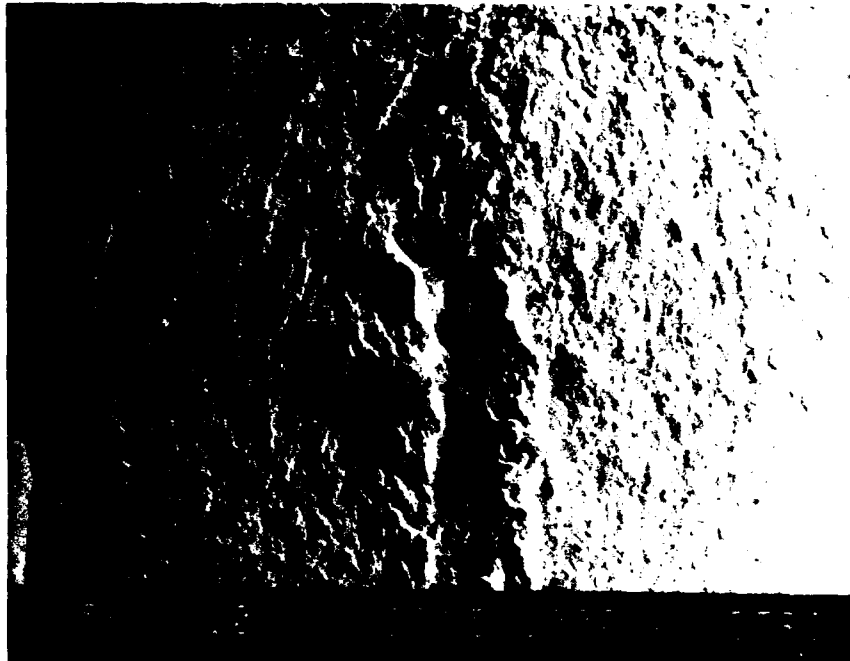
Example of inclusion-initiated fracture in a notched bend specimen from weld A44 (Specimen A44-5).
